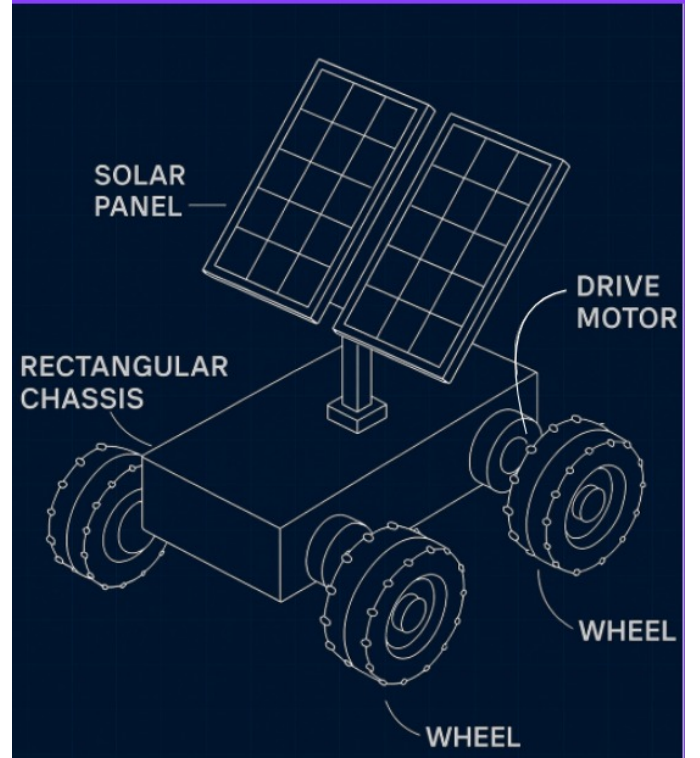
CAD schematic of the mechanical architecture, highlighting chassis, drive motors, and solar panel placement.
